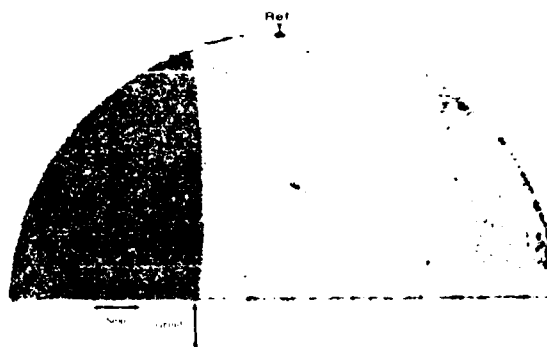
C-Scan Recording of 45 MHz, 18° Surface Wave Inspection of Top Surface of Segment of Billet of NC-350 RBSN Containing Machined Area (Scan Perpendicular to Grinding Direction).
